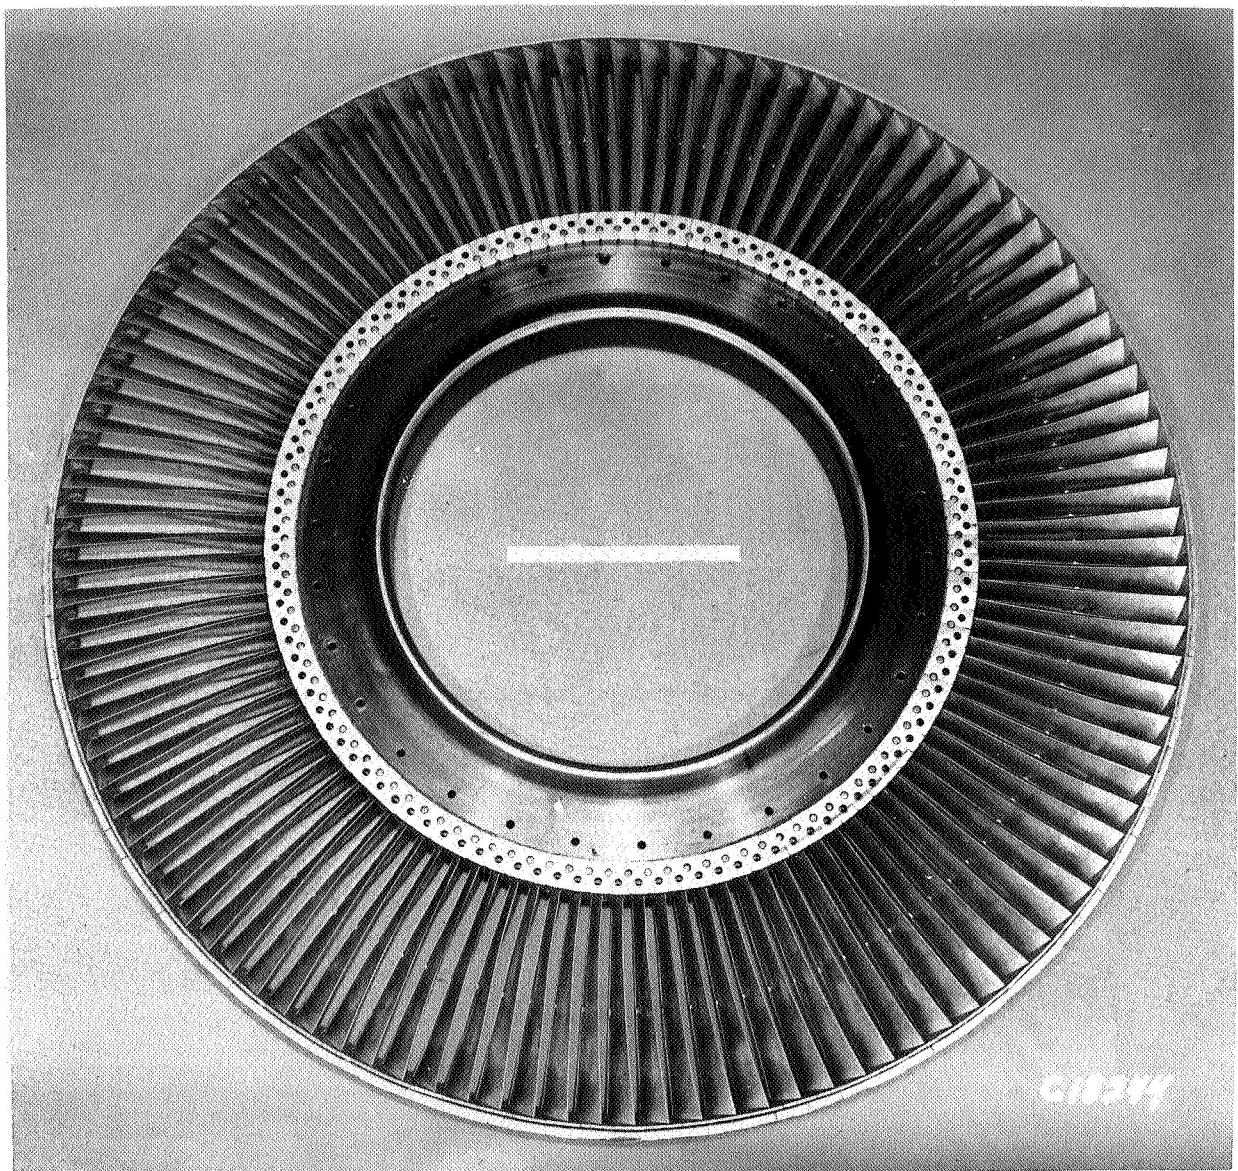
Three-Stage Turbine Plain Blade Rotor Assembled.
